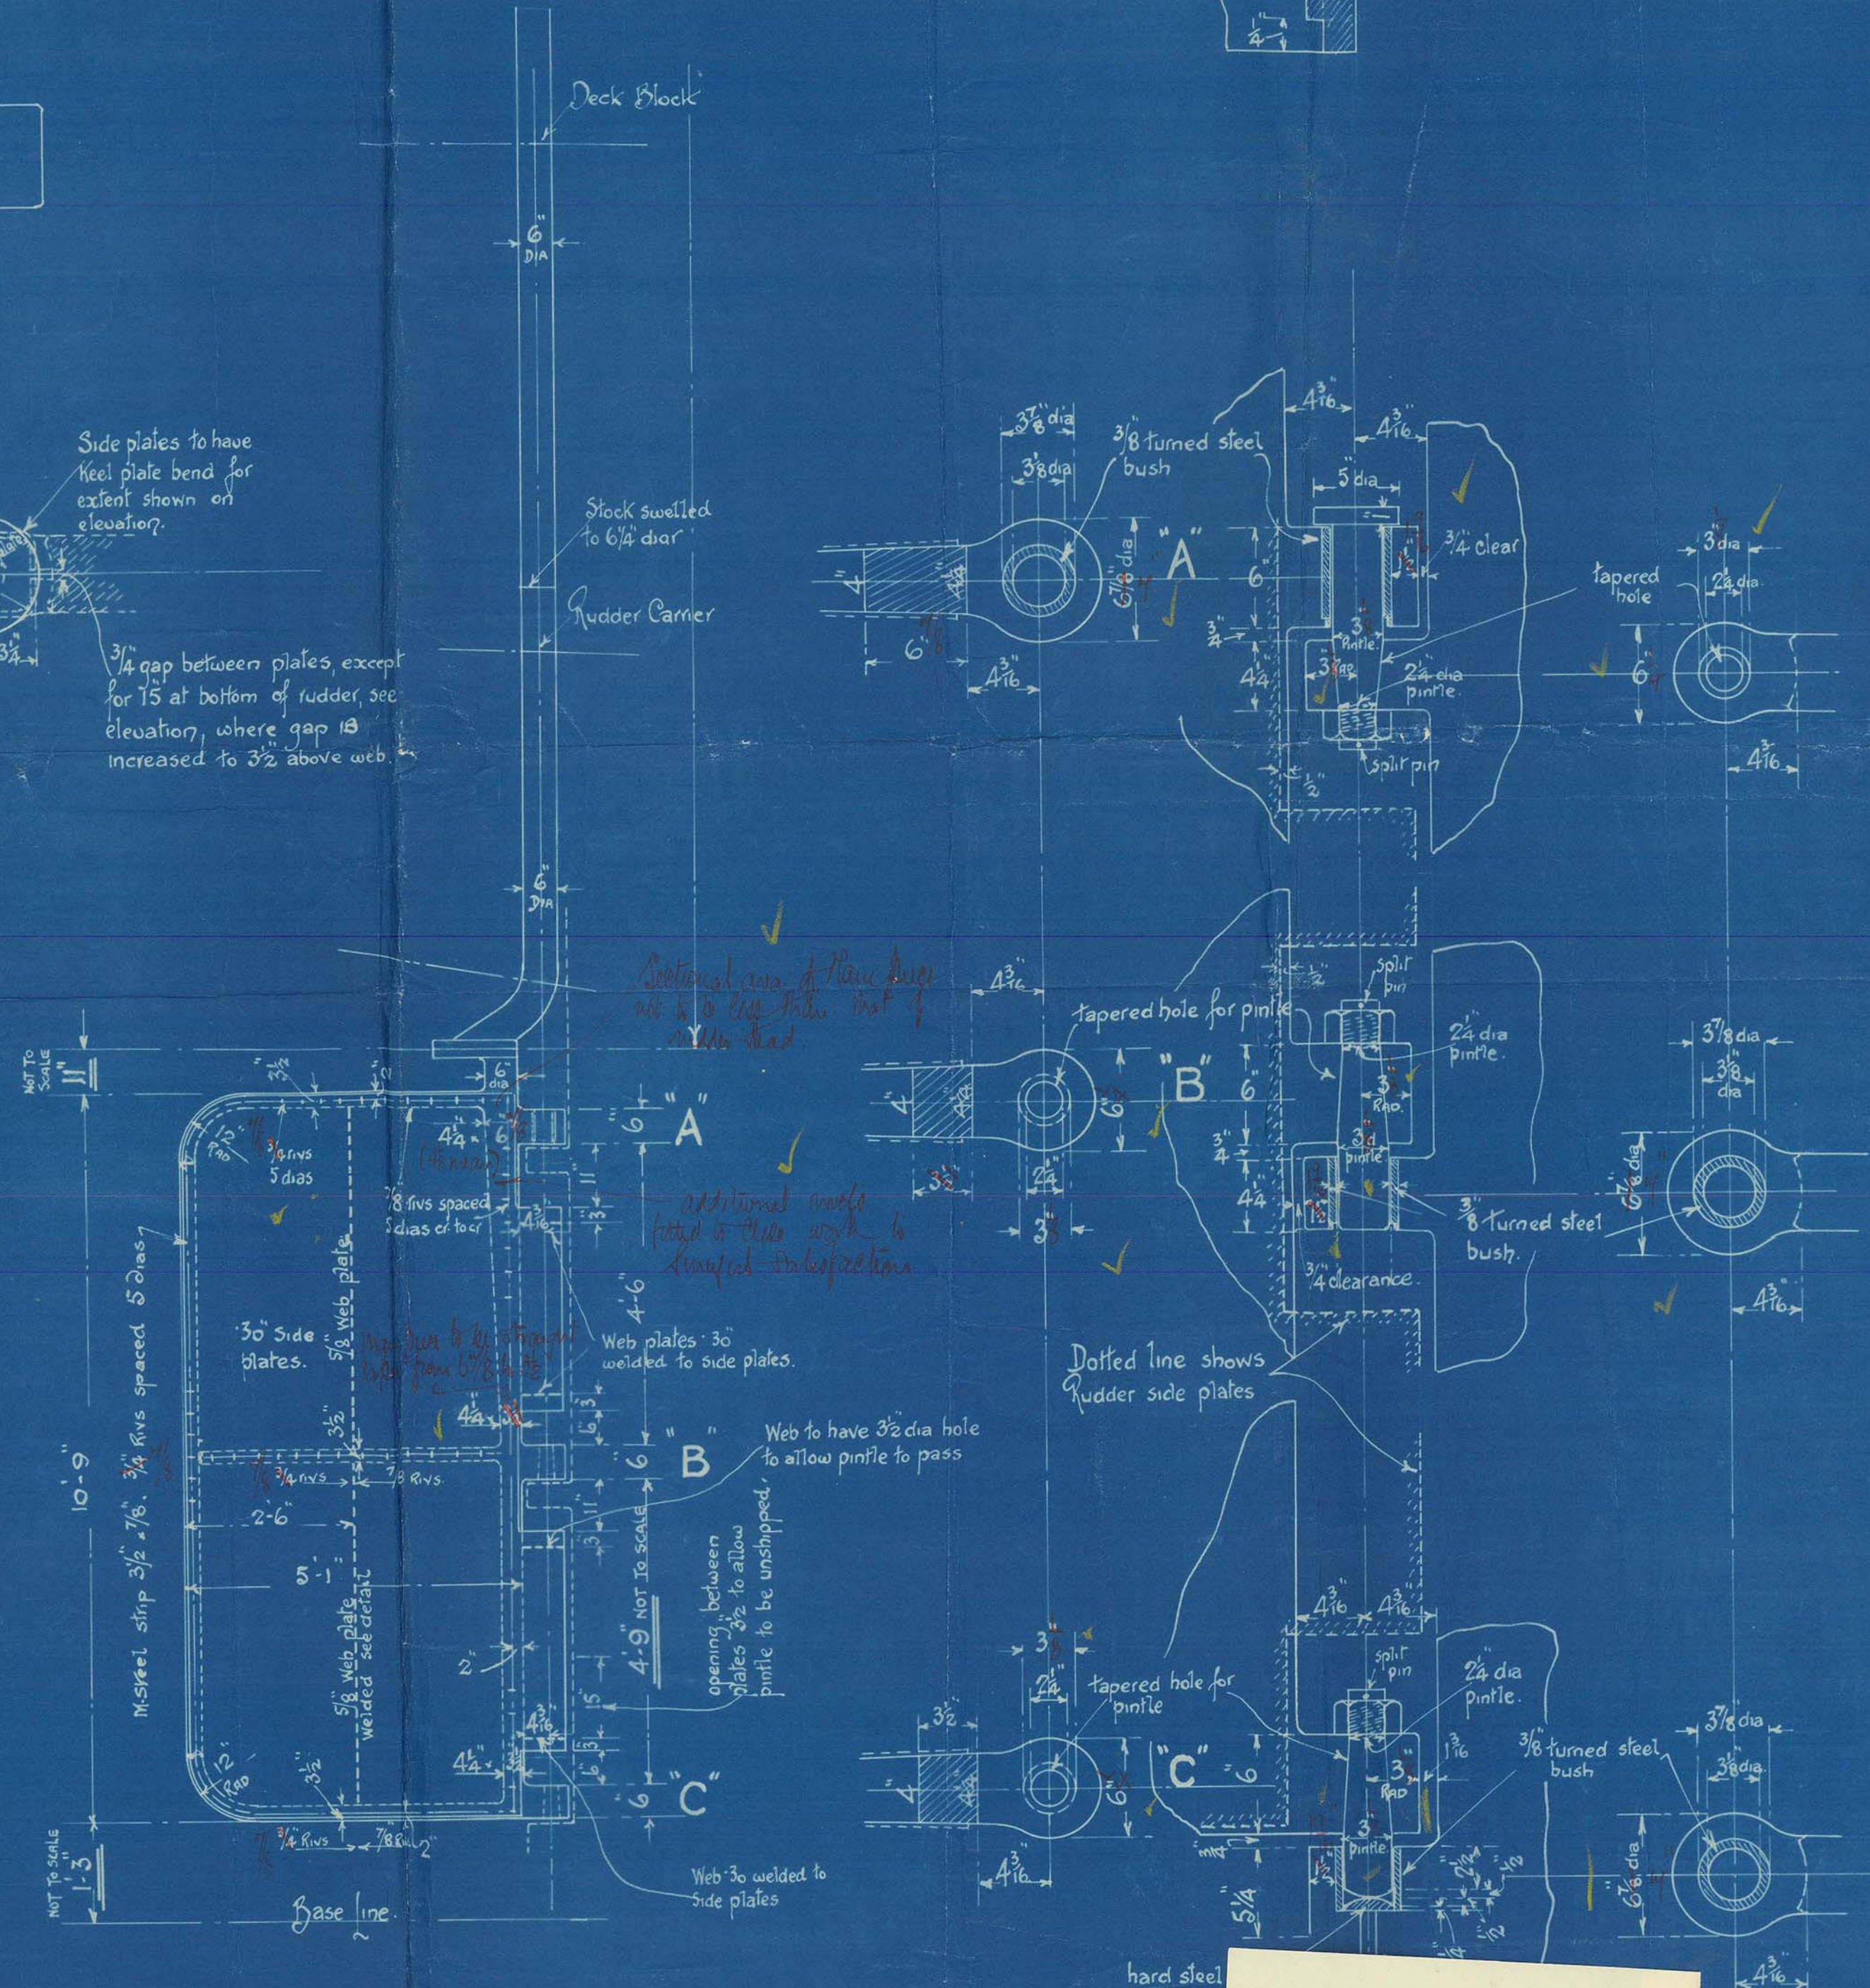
DETAIL OF BUSHING AT BOTTOM OF GUDGEONS, SEE PLAN. "A" RUDDER GUDGEON FULL SIZE "B" STERN FRAME GUDGEON.
